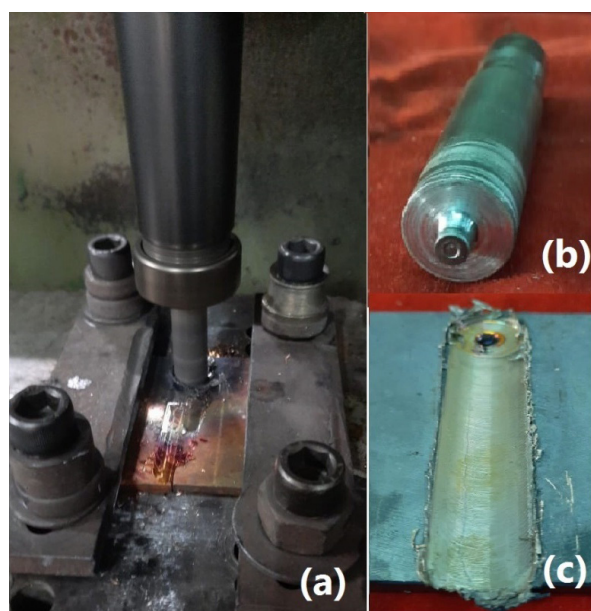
Friction stir welding; a) experimental setup, b) tool, and c) work piece
